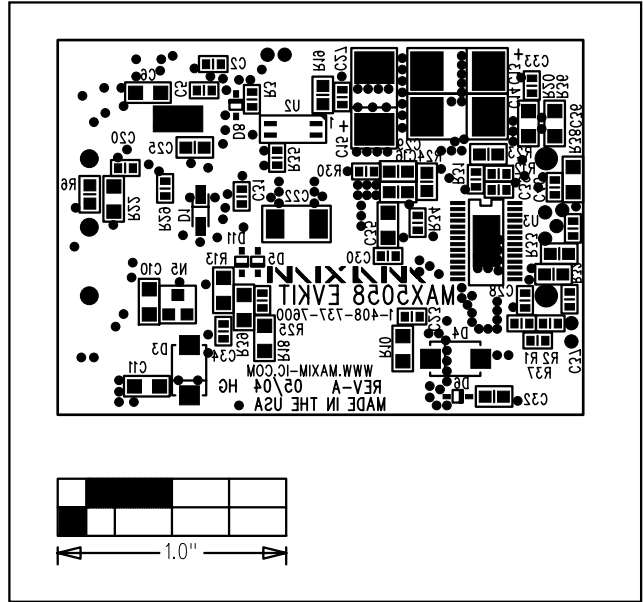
MAX5058 EV Kit Component Placement Guide—Solder Side
